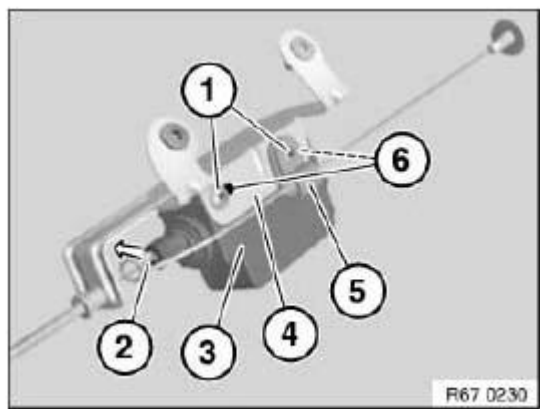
Unclipping Tank Filler Flap Bowden Cable
